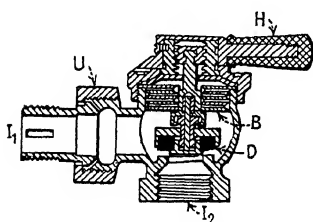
Steam radiator-inlet valve with bellows-type packing.
